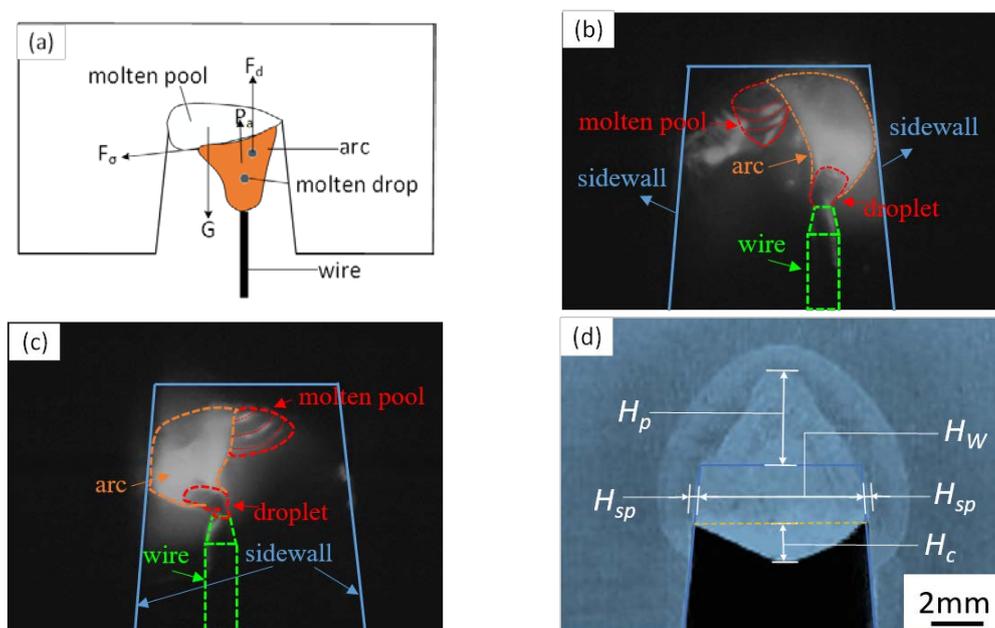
Weld formation of NG-GMAW overhead welding: (a) Forces acting on the molten pool. (b) High-speed camera image of the arc on the right sidewall. (c) High-speed camera image of the arc on the left sidewall. (d) Weld section morphology.
